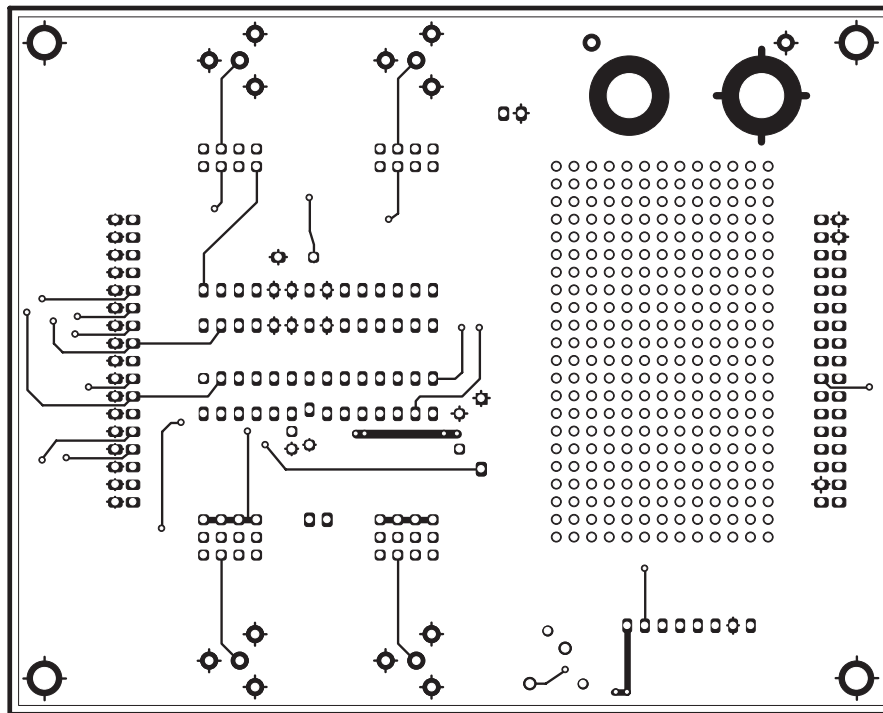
PCB, Bottom Side (Ground Plane Pour Not Shown)
